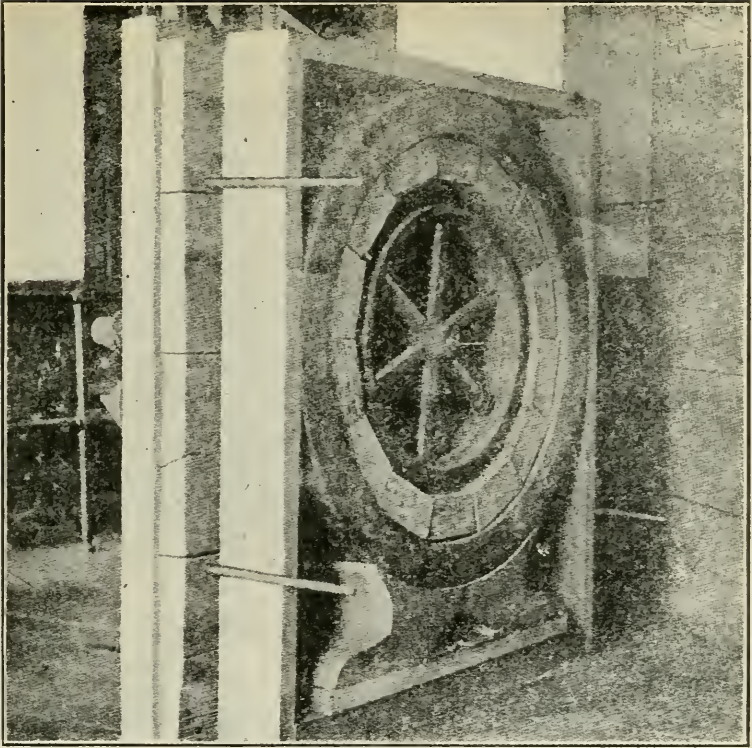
Casing for wheels. The outer ring is cast steel 36 inches in diameter ; sectional lining Norway pine.
